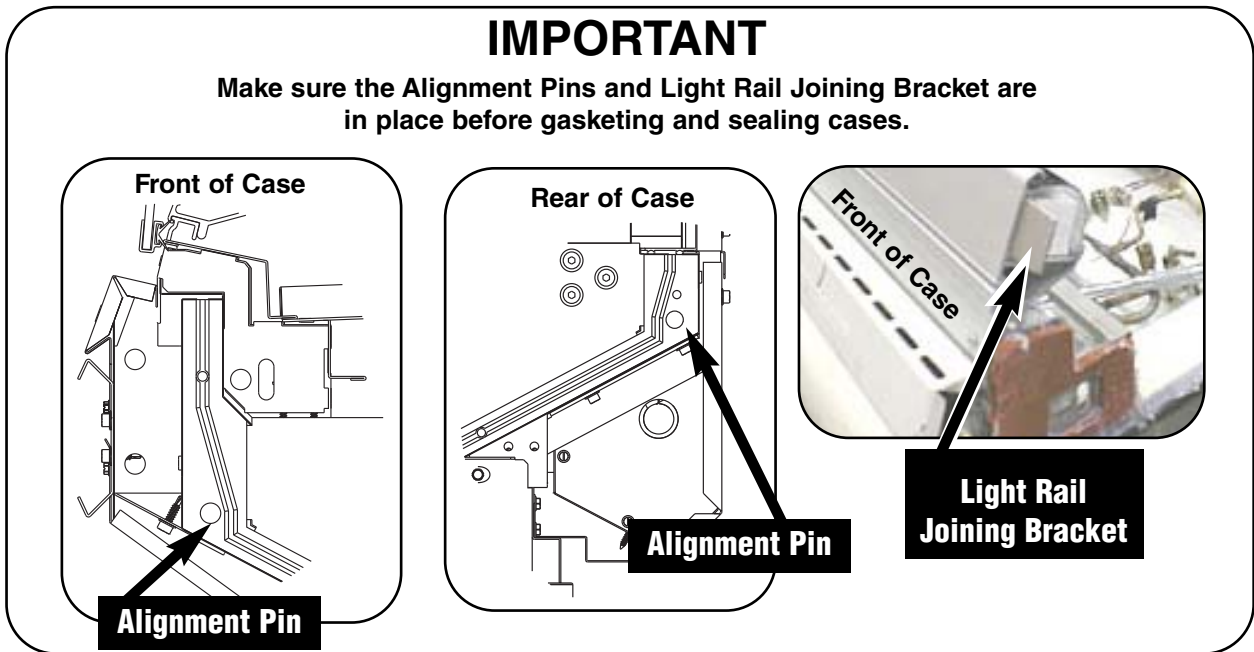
Install Alignment Pins and Light Rail Joining Bracket
